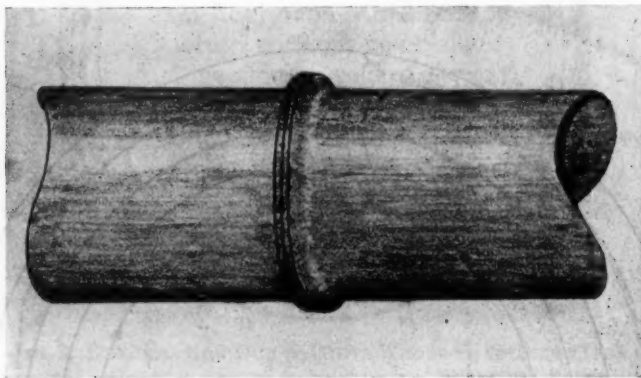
PIPE SECTIONS FLANGED, READY FOR THE PERIPHERIES TO BE WELDED
